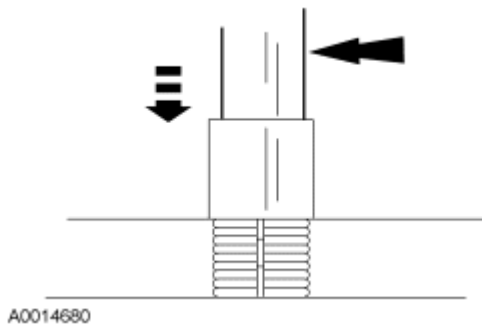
Tapping Installation Tool To Seat Insert Keys
